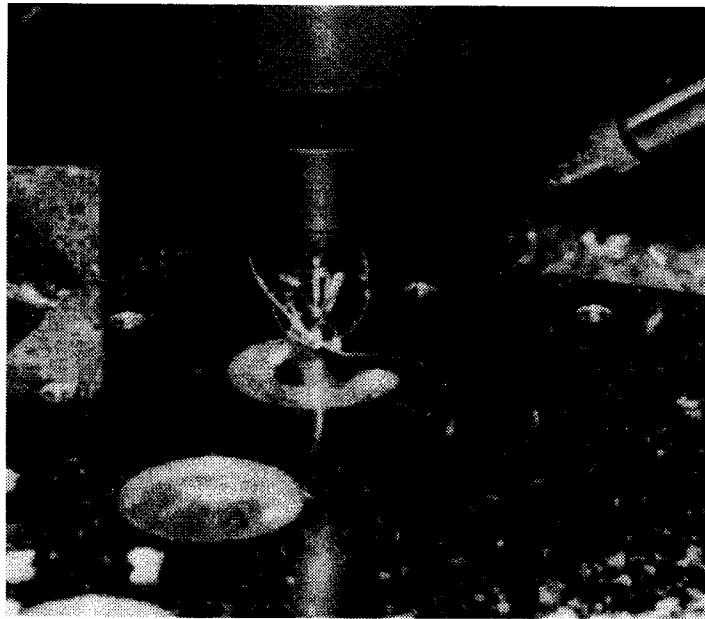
Photograph of CNC mill using circular interpolation to cut an accurate perforation pattern.
